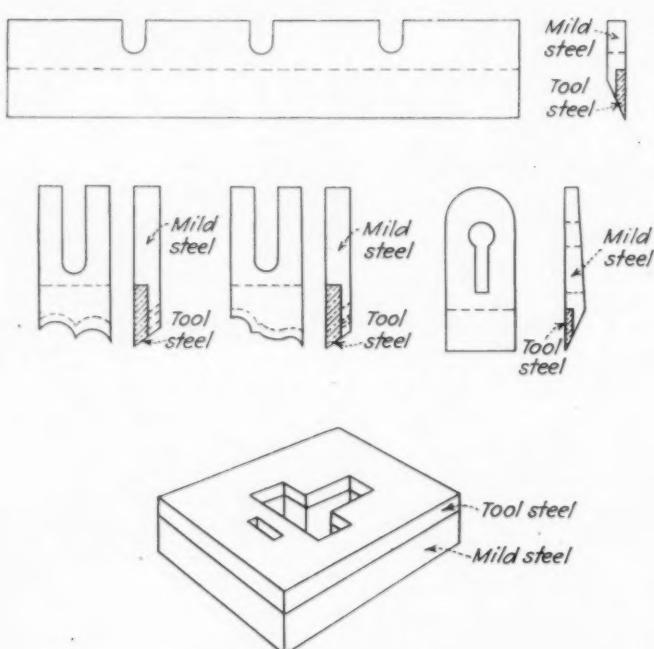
Some applications of composite tool steel. It is used for blanking and forming dies, paper knives, wood-working tools, etc.
